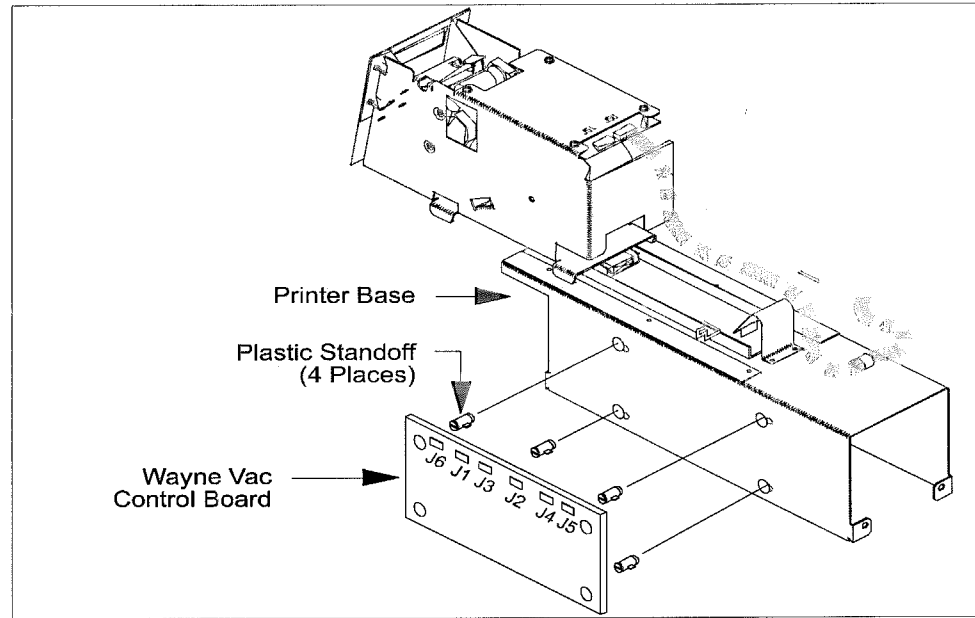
Mounting Wayne Vac Control Board To Printer Base
